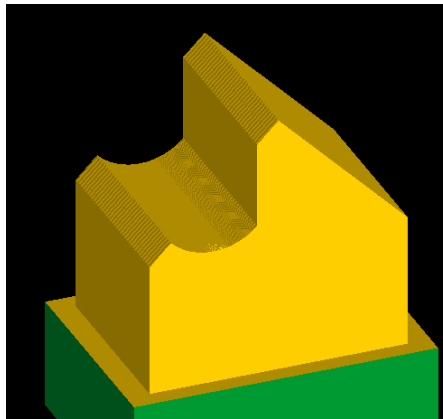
Screen shot of example part virtually machined in MasterCAM
